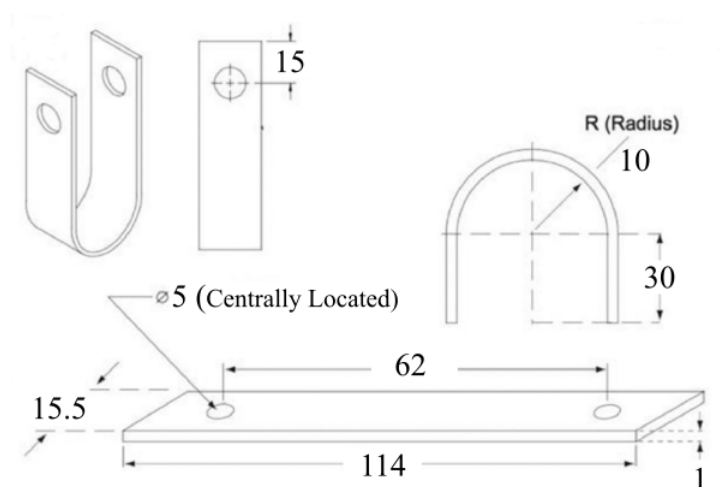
U-bend are cut to shape and bent with these dimensions
